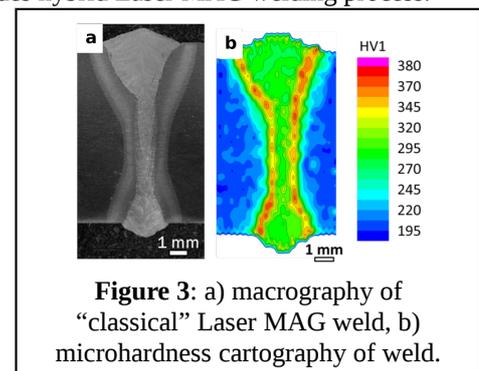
a) macrography of "classical" Laser MAG weld, b) microhardness cartography of weld.
